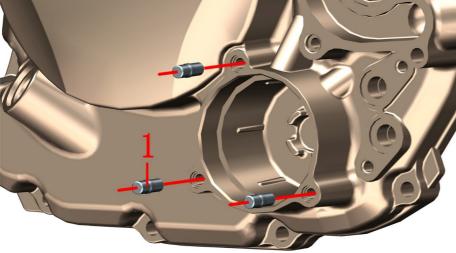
RIGHT CRANKCASE		Right cover parts	CHK
